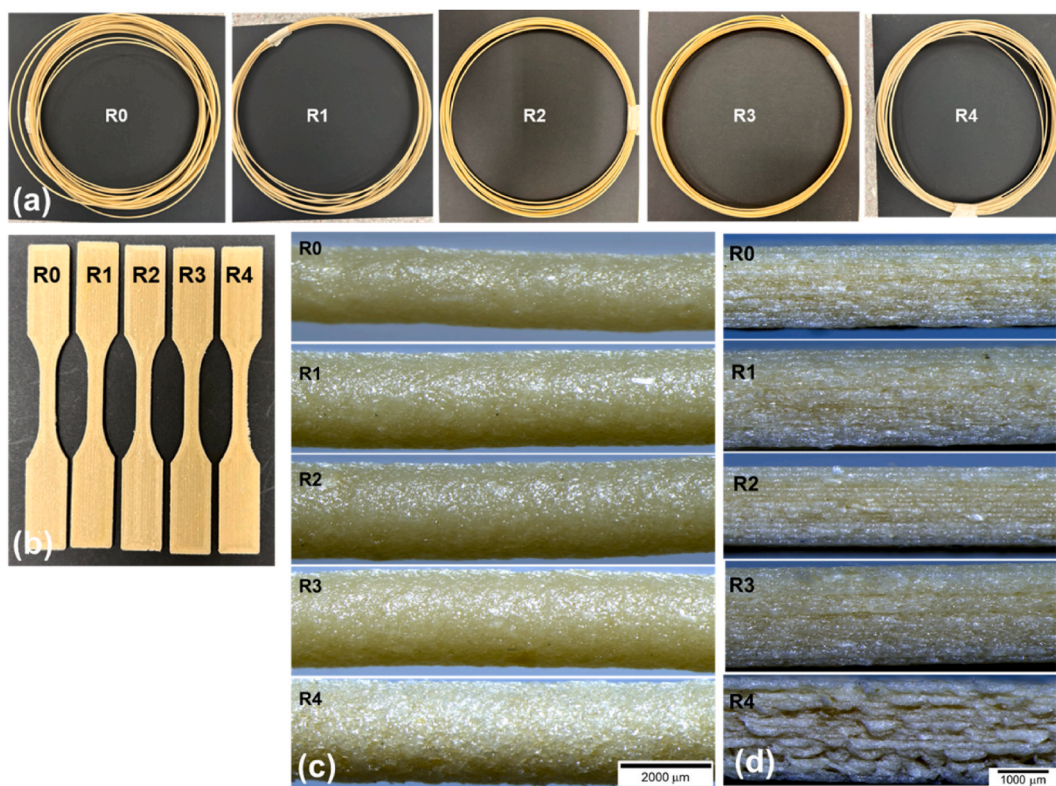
Digital images of (a) extruded filaments, (b) tensile testing specimens, (c) stereo microscopy images of extruded filaments, and (d) side view of tensile testing specimens produced from PLA/hemp hurd fibre composite containing 20 wt% fibre, before and after each recycling steps.
